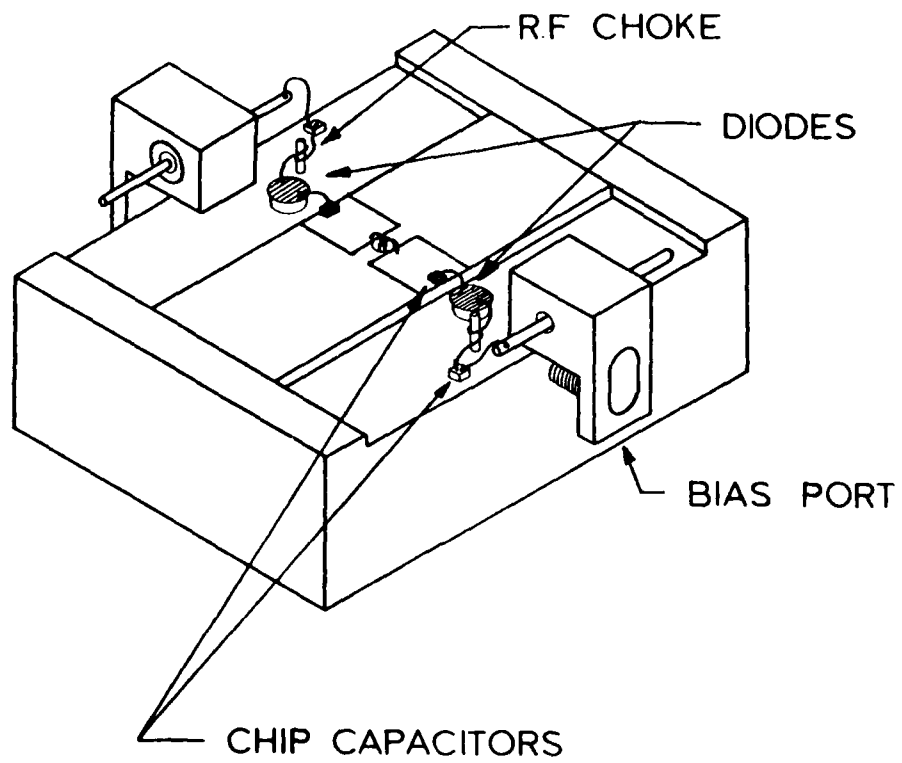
ILLUSTRATION OF MICROSTRIP COMBINER TEST FIXTURE.
